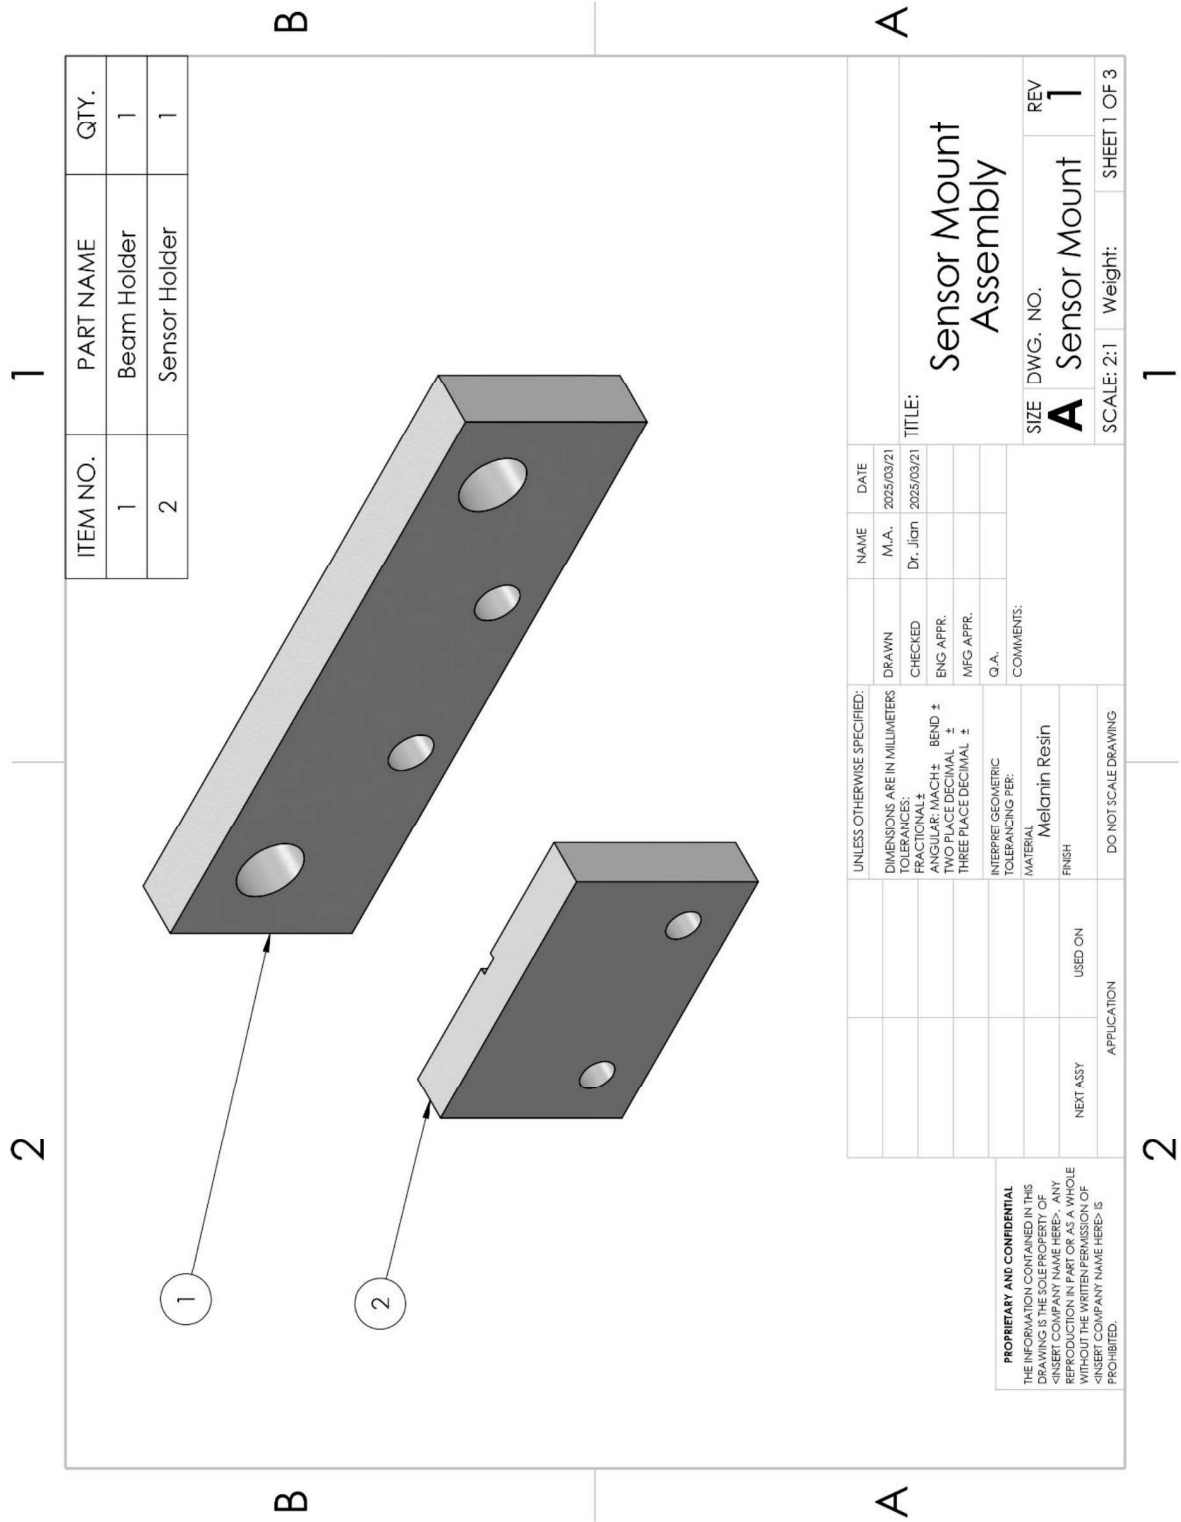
Detailed engineering drawing of 3D printed sensor mount assembly.
